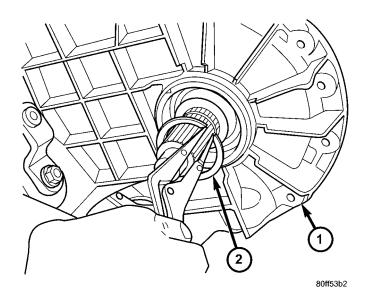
Remove Front Output Shaft Bearing Inner Snap-Ring
